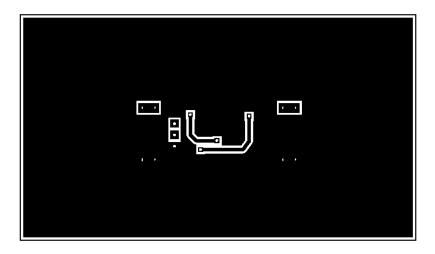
Step-Up Converter Demonstration Board Bottom Layer Copper
